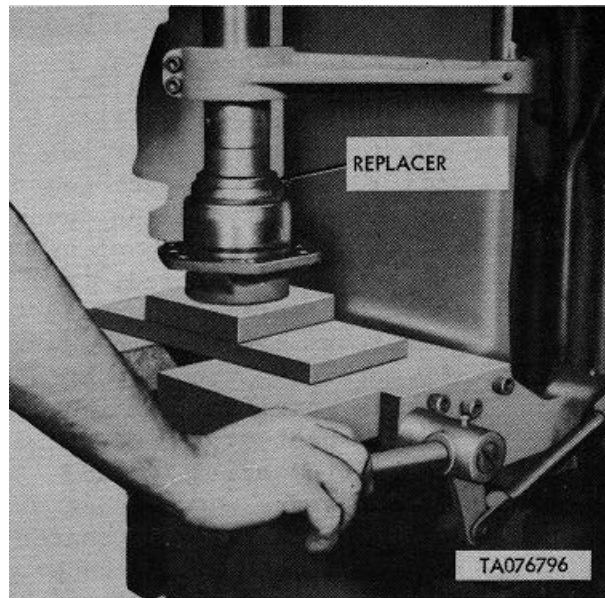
Axle - Roller Bearing Cups Installation Using Replacer
